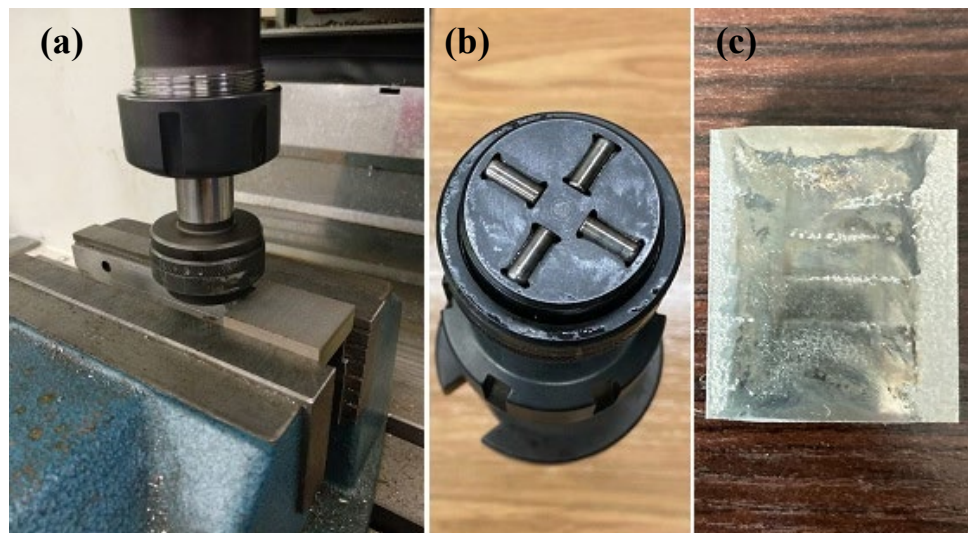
(a) Burnishing experimental setup (b) multi-roller burnishing tool (c) burnished sample.
